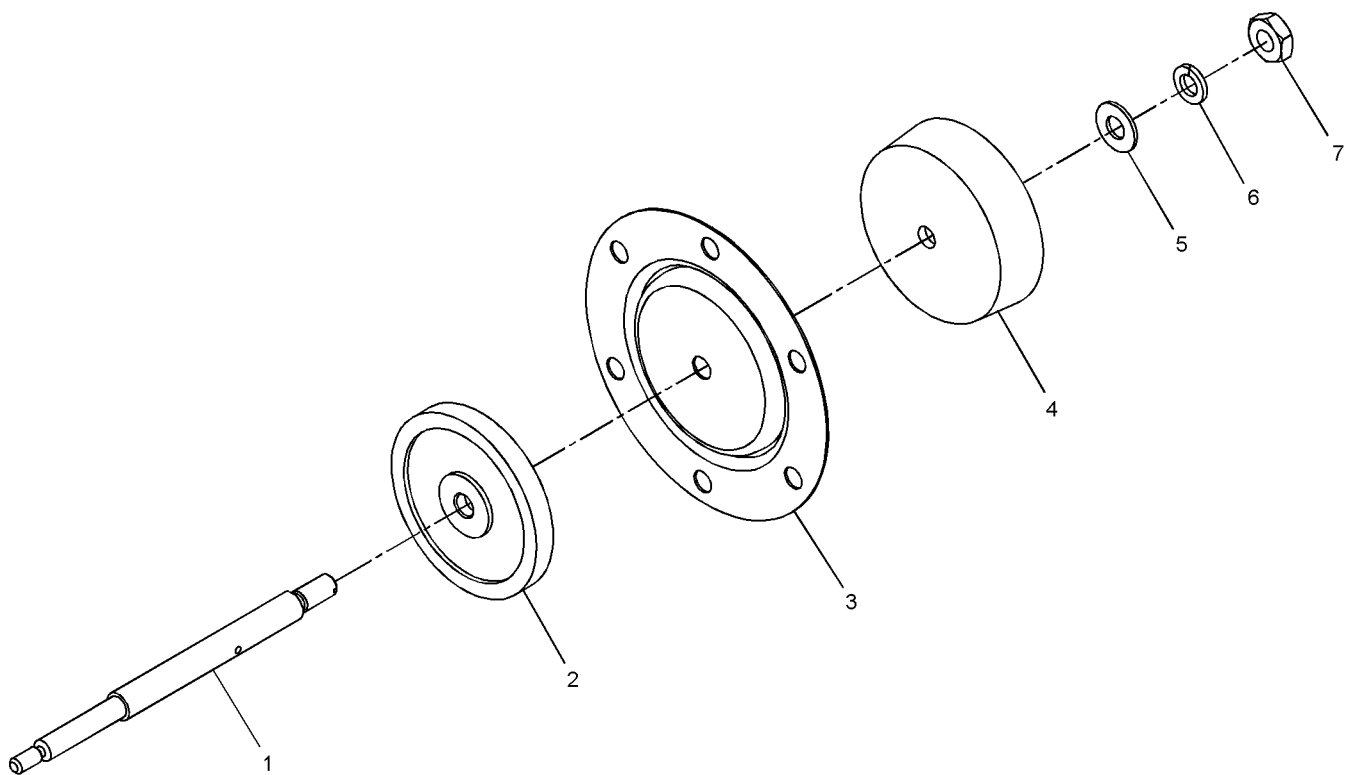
Diaphragm Assembly, P/N 1647152-1
